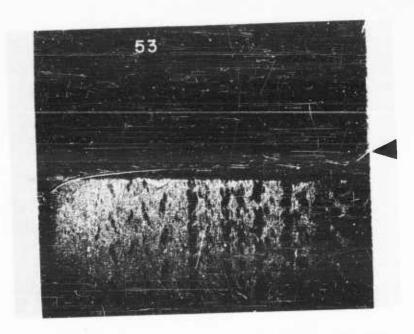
FAILURE IN SPECIMEN NO. 53
